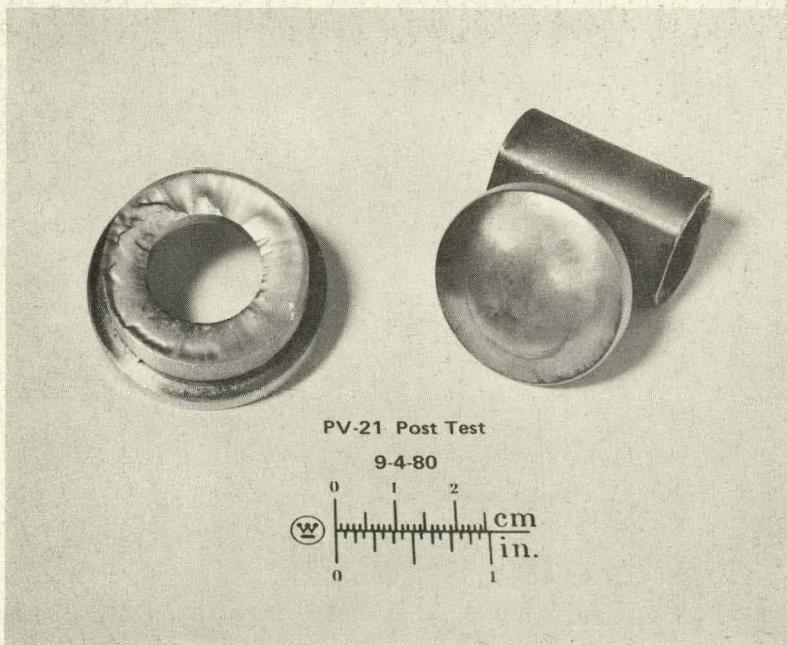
Plug and Seat of 1½-Inch Camflex Valve
